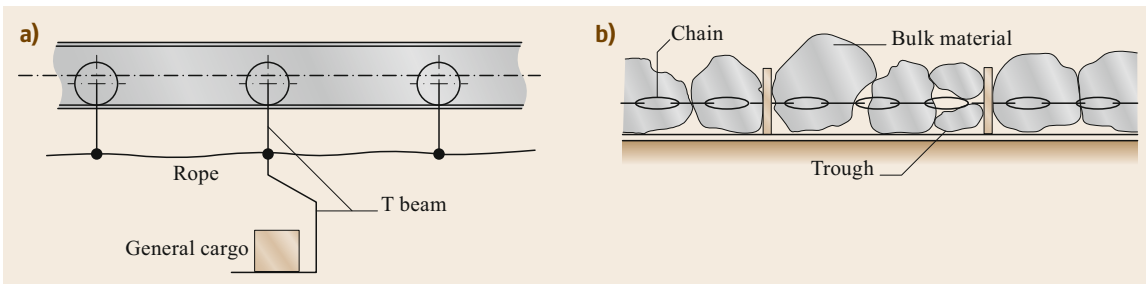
,b General identification of main components of continuous mechanical conveyors using the examples of (a) an overhead conveyor (tension device: rope; support device: T beam; goods: general cargo) and (b) a scraper conveyor (tension device: chain; support device: trough; goods: bulk material)
